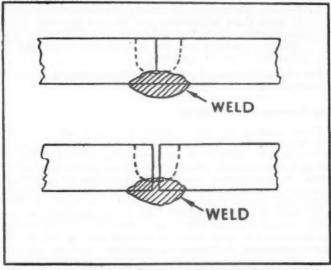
THE DOTTED LINES INDICATE METAL REMOVED BY GOUGING IN THE PREPARATION OF BUTTED PLATE EDGES FOR WELDING.
